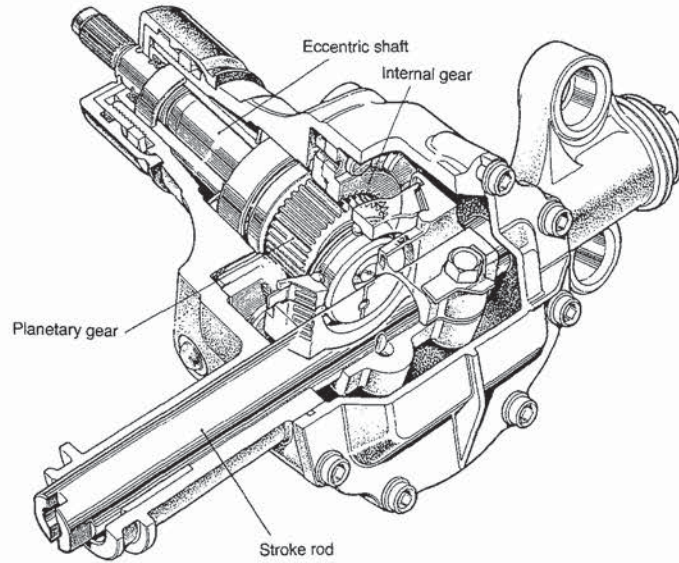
Rear steering actuator of full mechanical 4WS.
